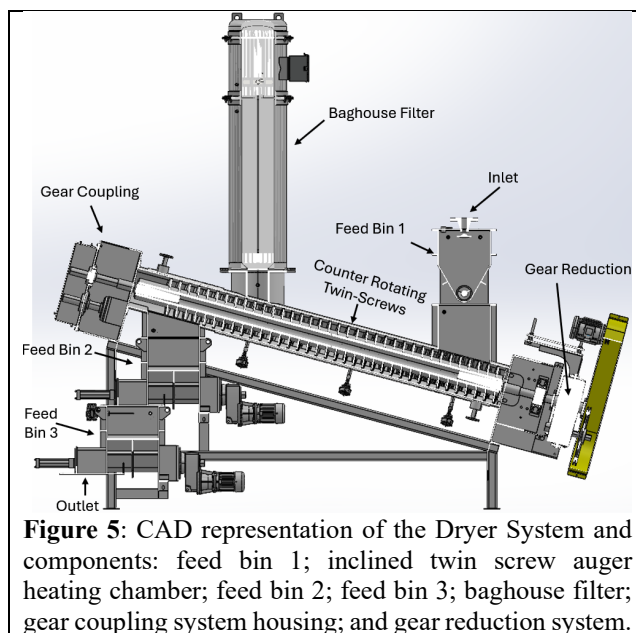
CAD representation of the Dryer System and components: feed bin 1; inclined twin screw auger heating chamber; feed bin 2; feed bin 3; baghouse filter; gear coupling system housing; and gear reduction system.
